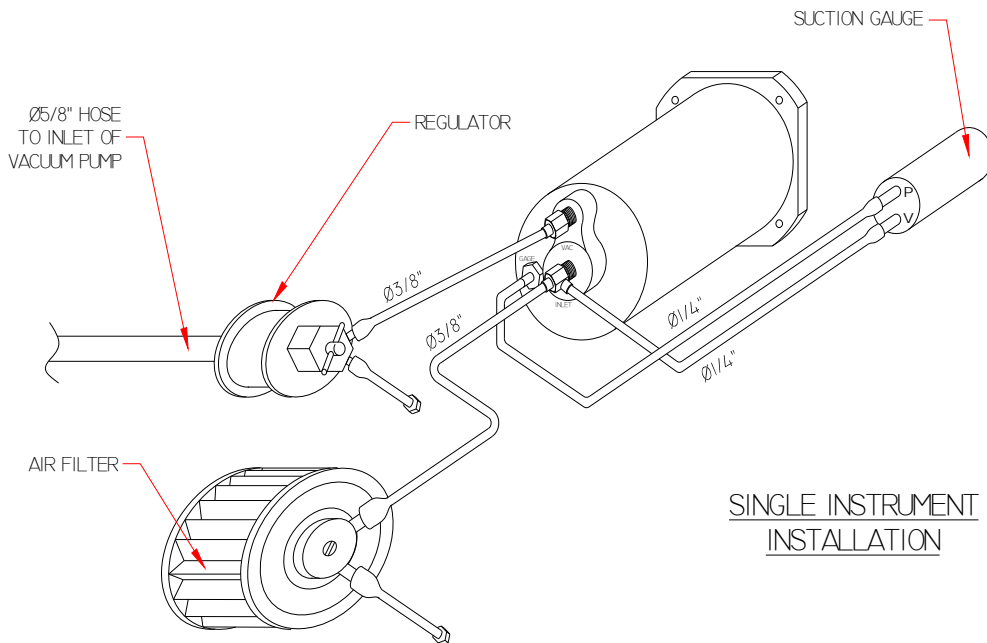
Vacuum System Single Instrument Installation (Sheet 3 of 3)
